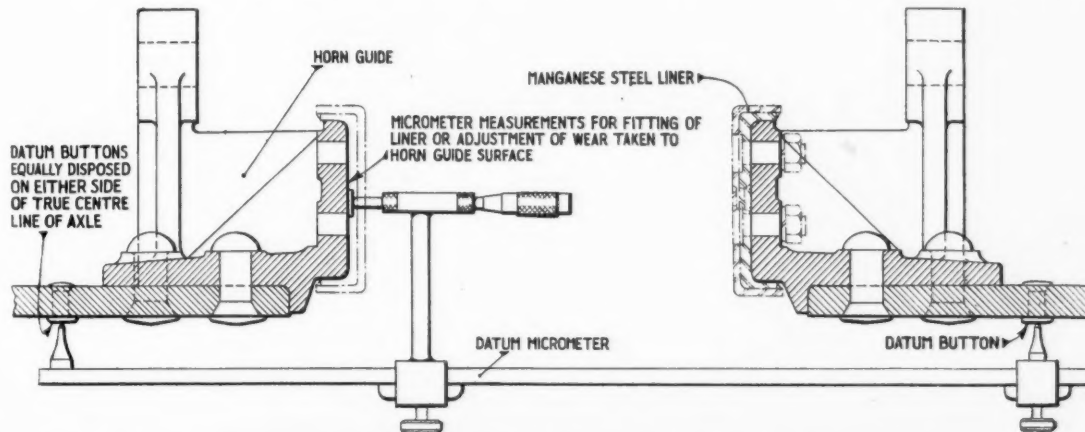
Method of measuring distance between horn faces and datum points
